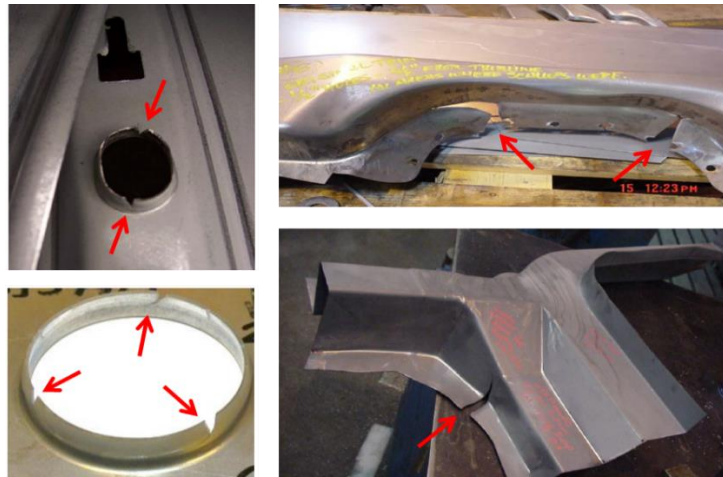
Sheared edge cracking of AHSS after (left) out-of-plane stretch flanging and (right) in-plane edge drawing [16], [17].
